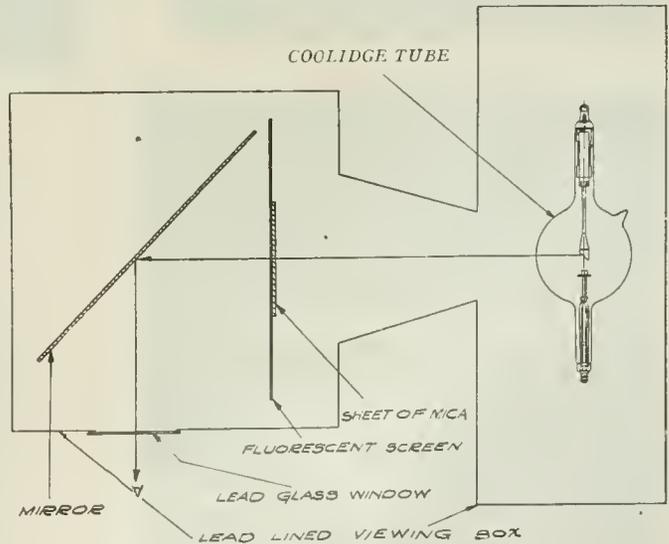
Arrangement of Coolidge Tube and Viewing Box for Inspection of Built-up Mica
